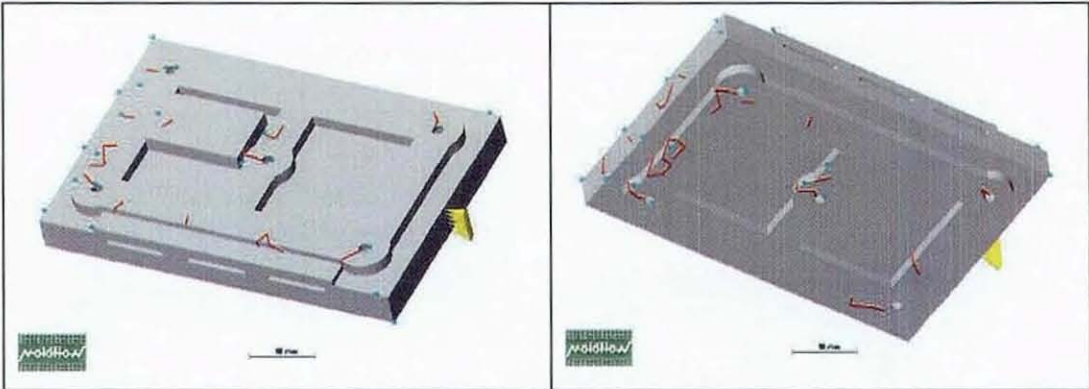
Weld lines and air traps at the end of injection cycle for topographical moulding tool [courtesy of Schmidt, 1999]
